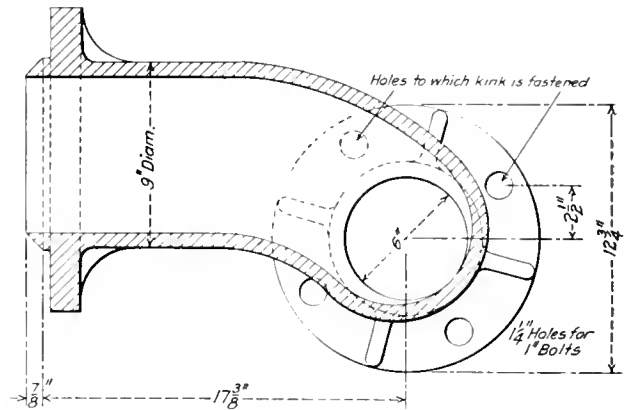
Tee-Head, Showing the Holes Through Which the Lifting Rods Are Attached.
